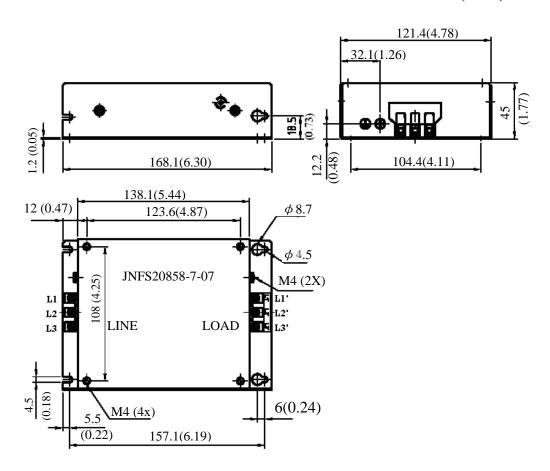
External Filter Dimensions JNFS20858-7-07
